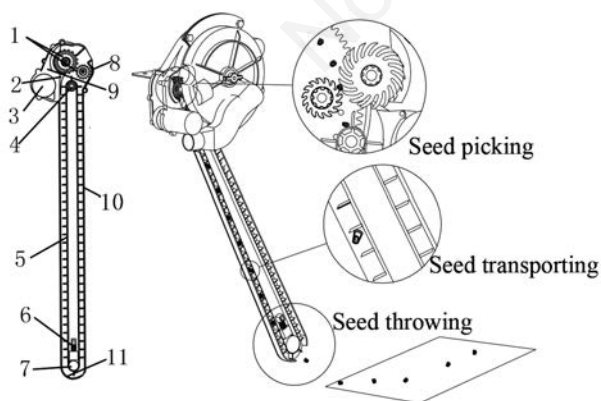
Assembly structure of air-suction seeding apparatus and belt-type corn high-speed seed guiding device. 1) Feeder wheels; 2) seed cleaning claw; 3) motor; 4) driving pulley; 5) seed conveying belt; 6) pre-tightening spring; 7) driven pulley; 8) gear box; 9) seed protection cover; 10) seed conveying belt shell; 11) seed throwing plate.
